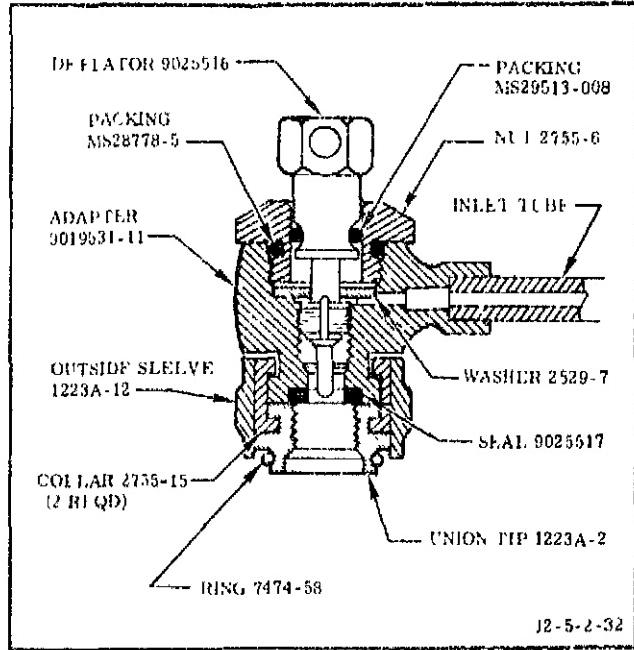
Electrical Package Pressure Monitor Adapter Assembly
